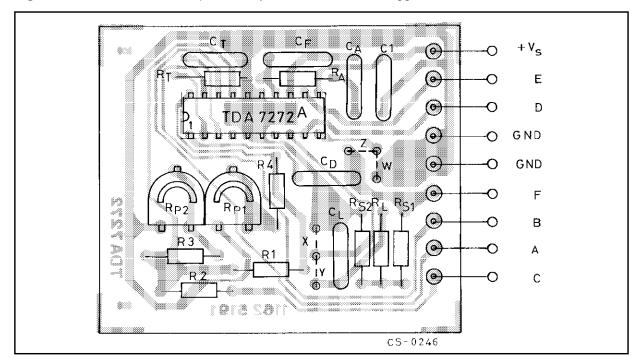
P.C. board and components layout of the circuits of Figg. 20, 21, 22.
